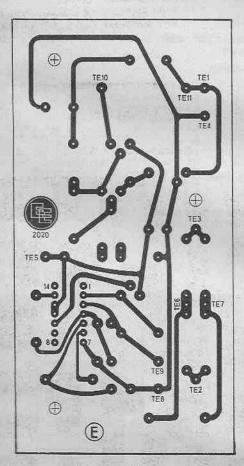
Board E of the 2020 Tuner Amplifier: underside view showing printed circuit (full size).
